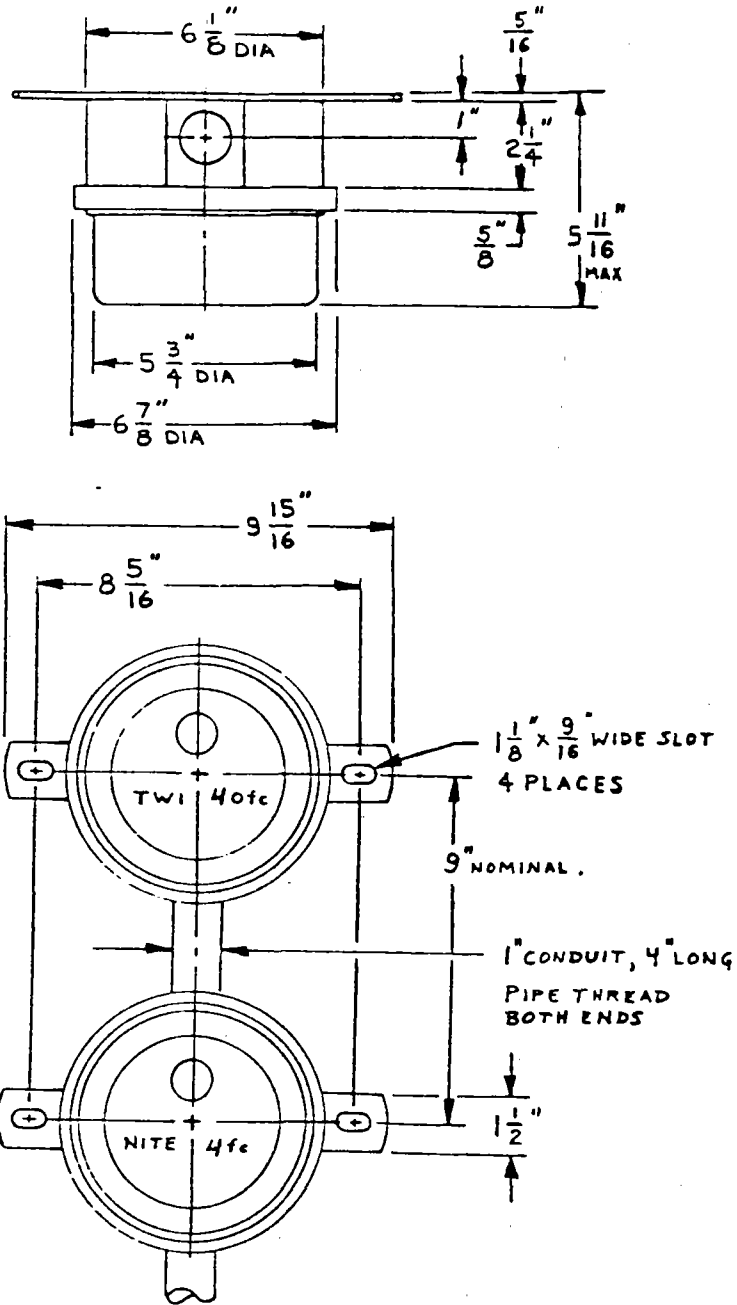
Outline Drawing of Ganged PEC-405 Controls (A-1360)
